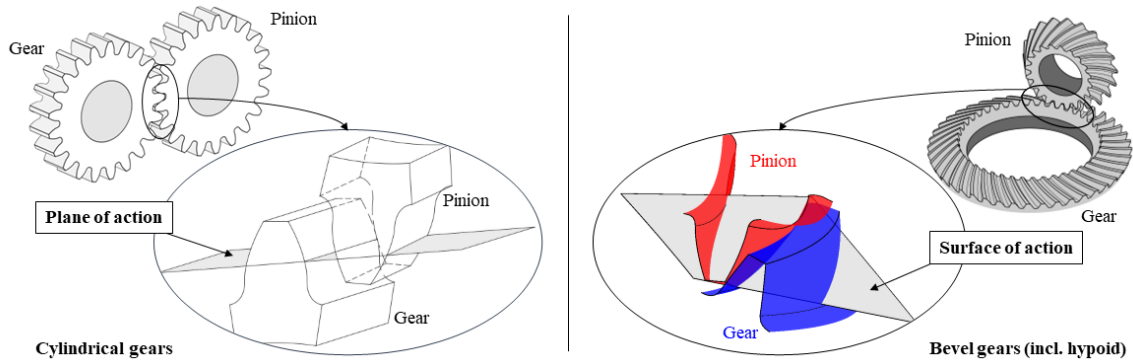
Illustrating plane of action concepts for cylindrical gears and the surface of action for bevel gears.
